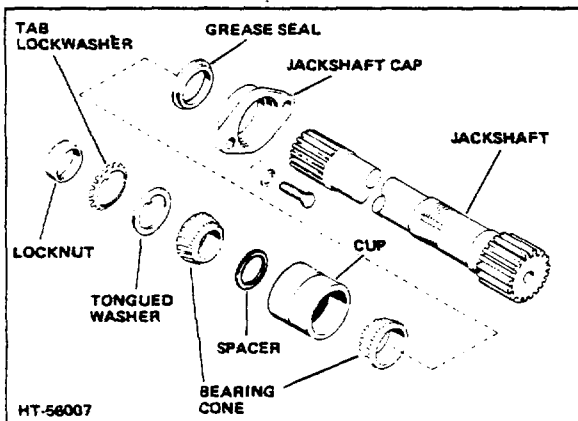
Jackshaft Assembly (ACE 20 thru 80)
